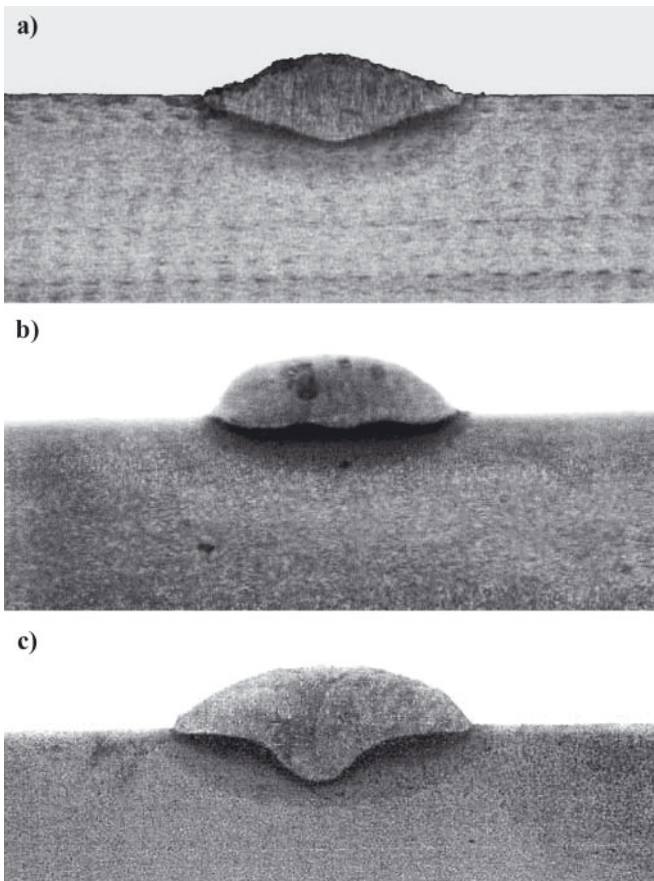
Cross-sections of padding welds: a) C III – C1 shielding gas, b) R III – R1 shielding gas, c) M III – M21 shielding gas
